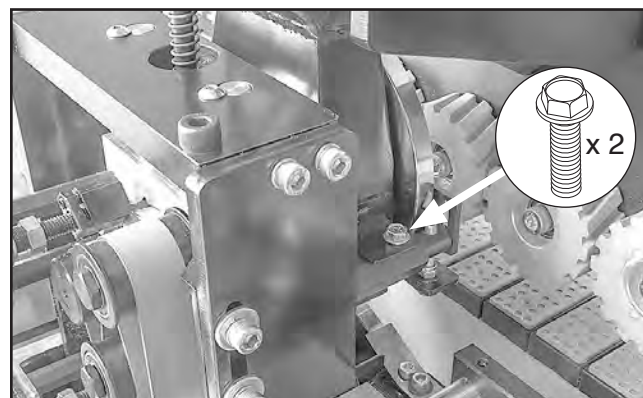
Location of upper trimmer dust shroud and flange bolts.
